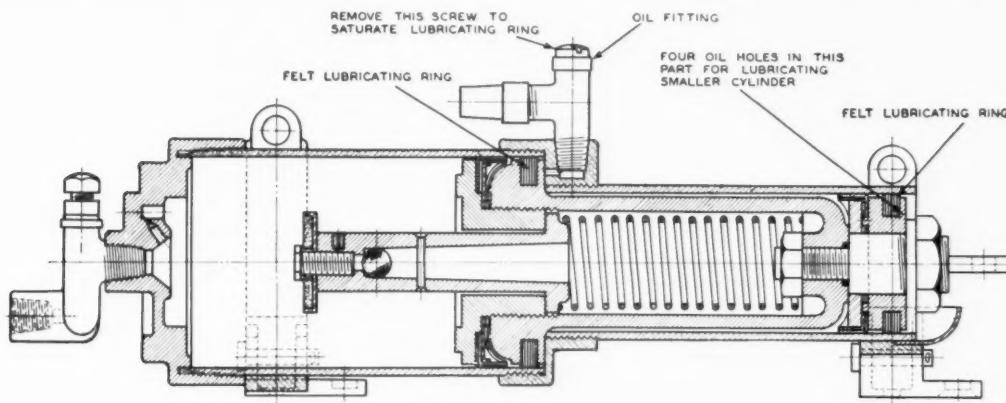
Structural details of a differential door engine of the oil lubricated type.
